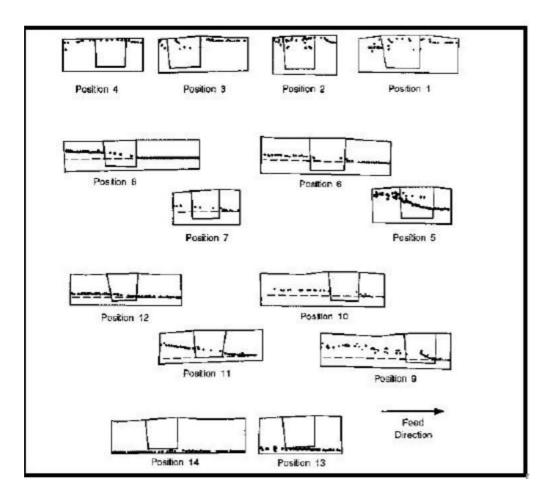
Drawings generated from each of the side view radiographs for the 6061 welds are shown above
